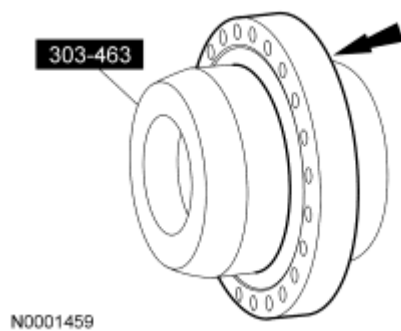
Locating Camshaft Oil Seal On Special Tool
